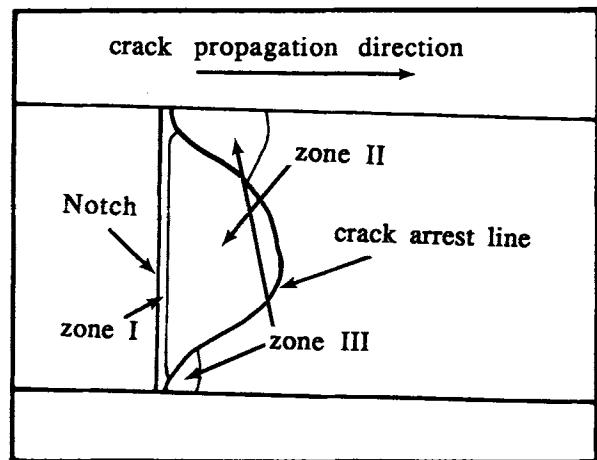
The fracture surface of a specimen fractured in liquid nitrogen at P_a point in Figure 2(b).
